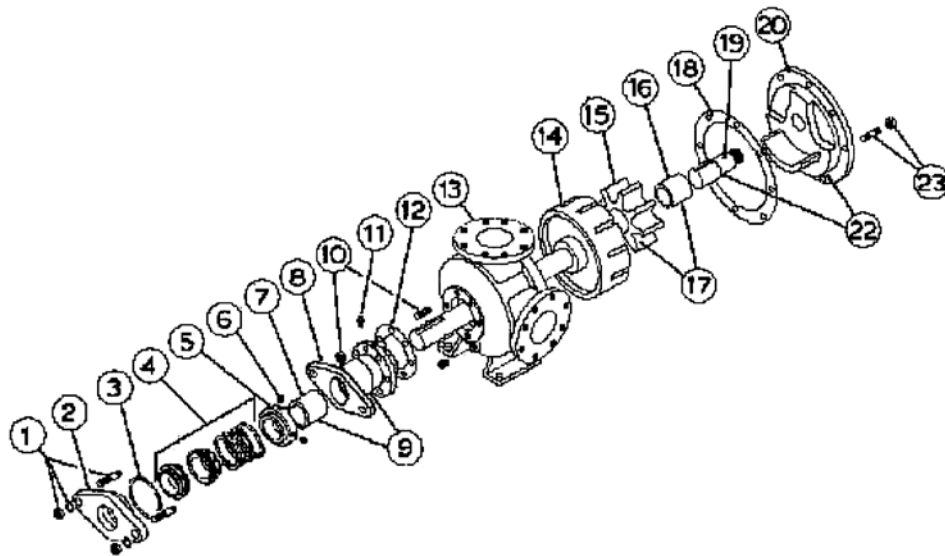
EXPLODED VIEW FOR MECHANICAL SEAL PUMPS — MODEL KK-230
